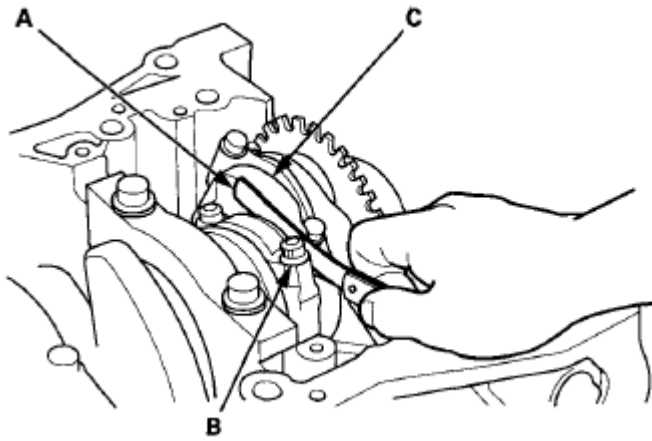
Measuring Connecting Rod End Play Using Feeler Gauge Between Connecting Rod And Crankshaft
